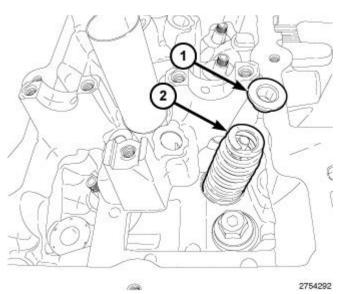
Valve Spring & Valve Spring Retainer Courtesy of CHRYSLER GROUP, LLC
